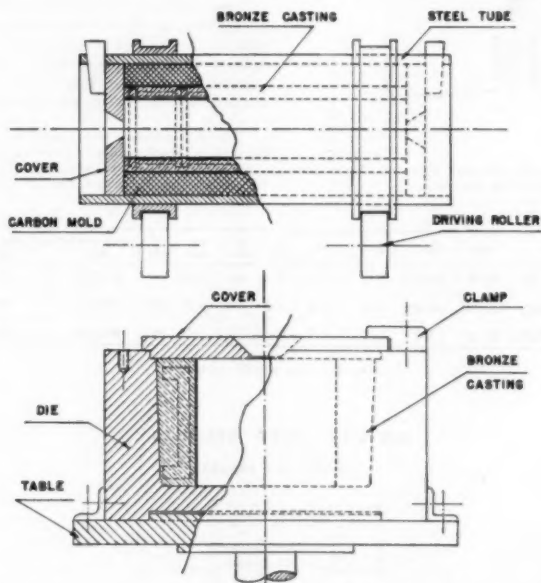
HORIZONTAL AND VERTICAL MOLDS USED FOR CASTING CENTRIFUGALLY BRONZE BEARING SHELLS
